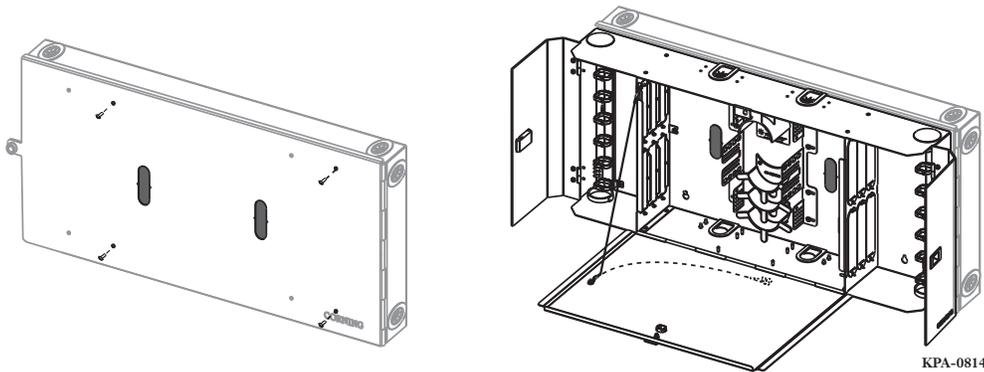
Mount Slack Storage Housing to PWH Connector Housing
